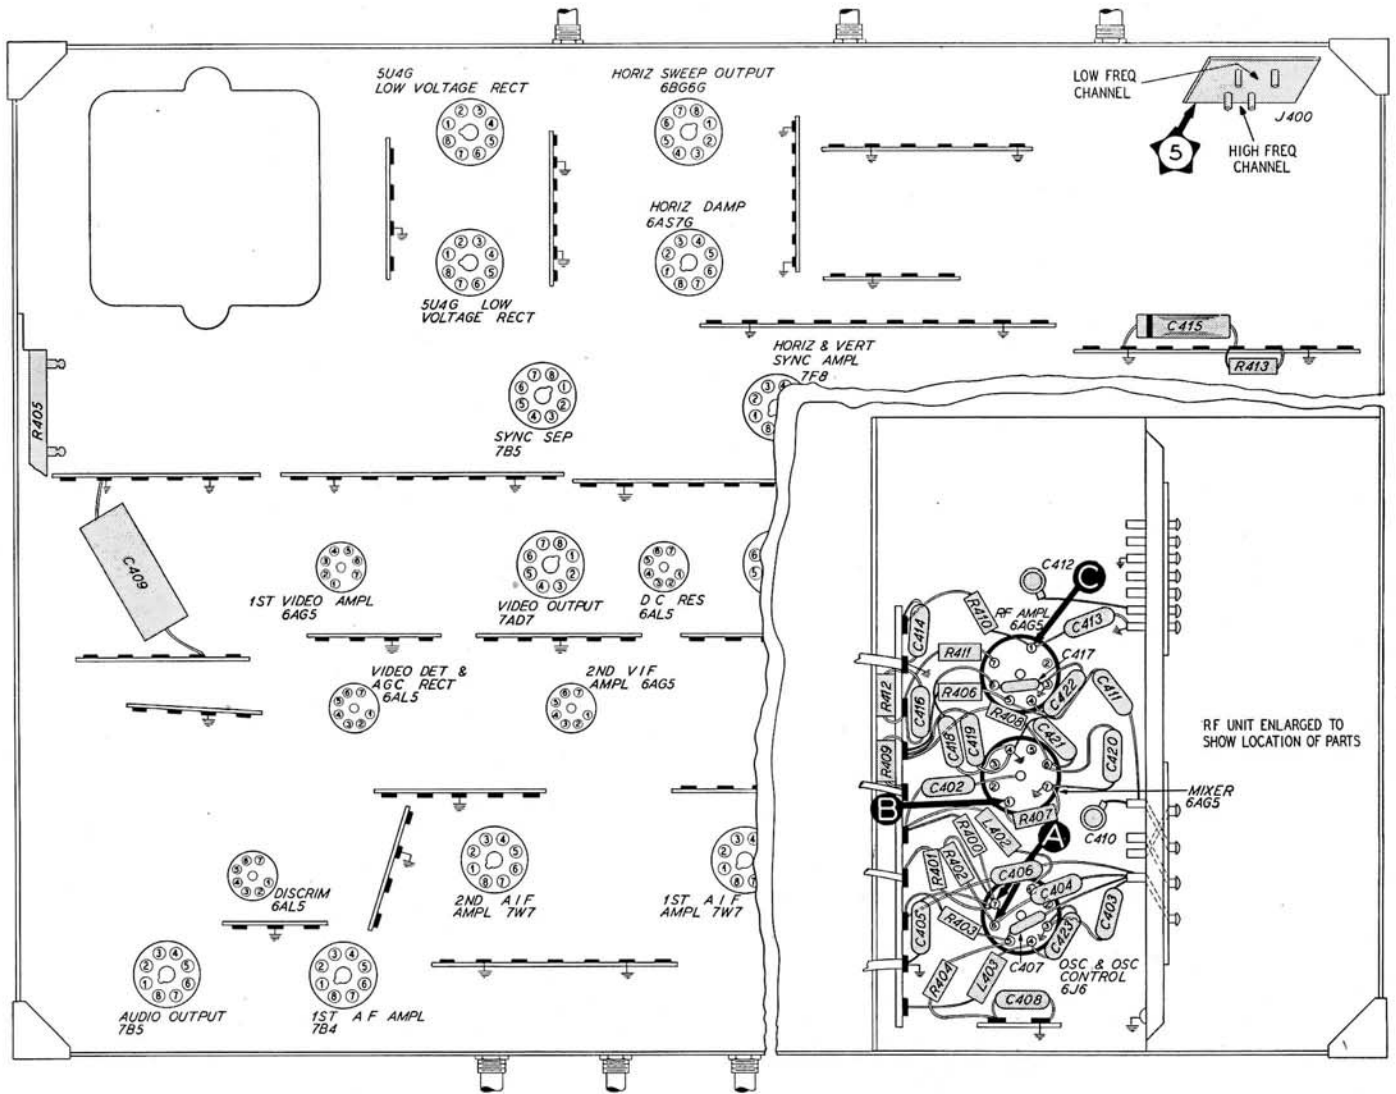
Bottom View of Chassis, Showing Section 4 Test Points
